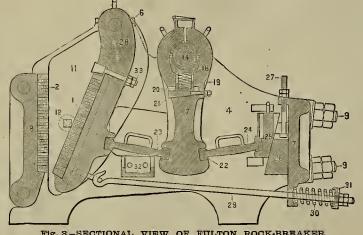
SECTIONAL VIEW OF FULTON ROCK-BREAKER
